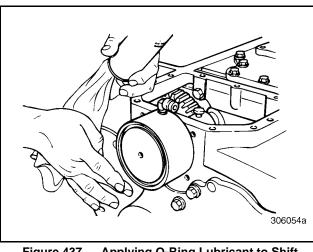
Applying O-Ring Lubricant to Shift Cylinder
